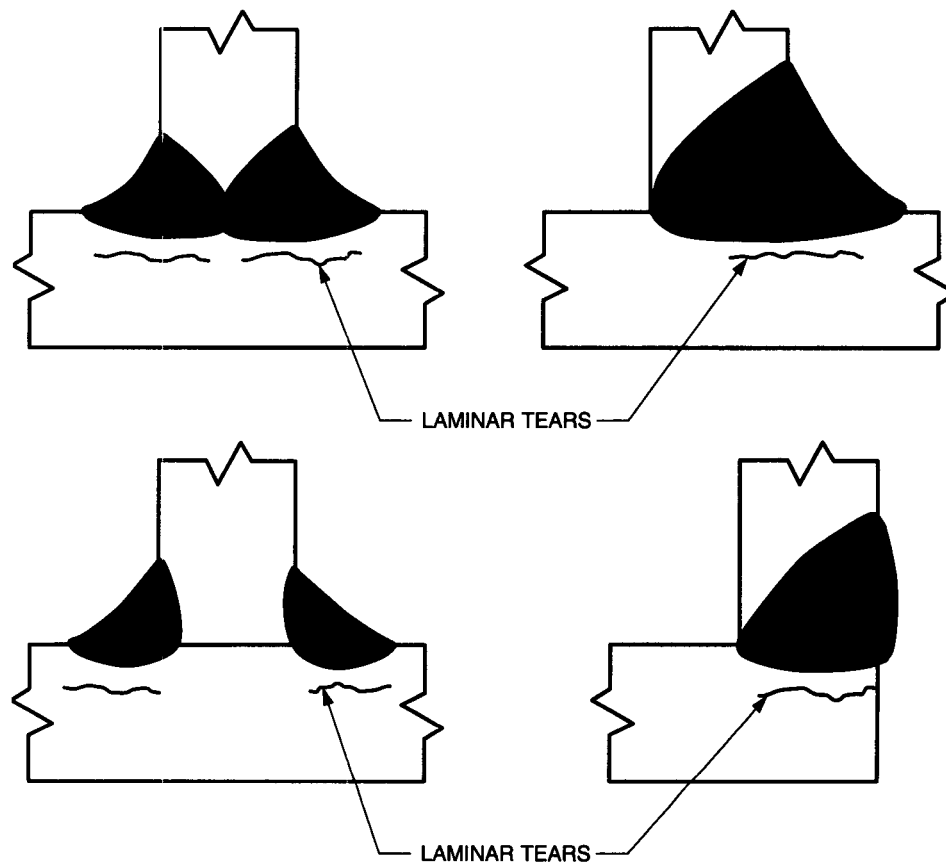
Weld Joint Designs in Steel Plate that are Prone to Lamellar Tearing and the Likely Location of Tears
